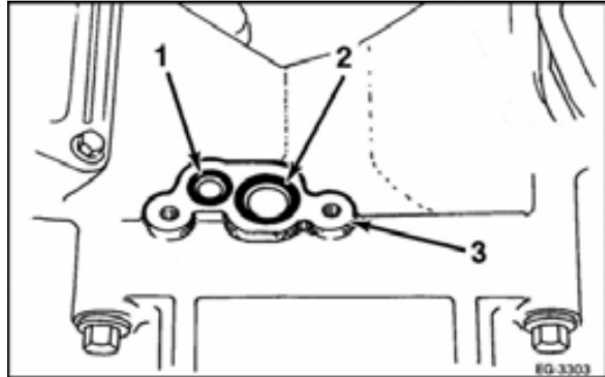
Turbocharger Oil Supply and Oil Drain Ports
